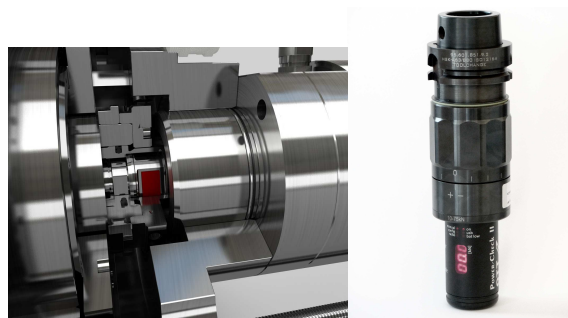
Internal measurement of spring force (left) und pull-in force measurement device
